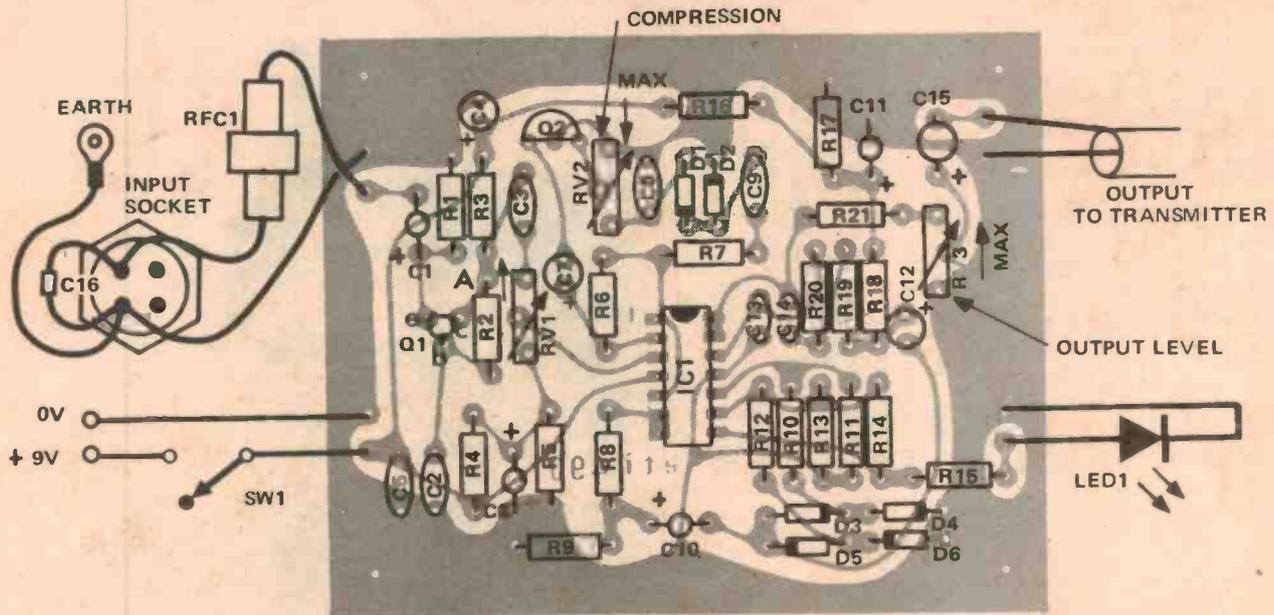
Component overlay of the Audio Processor. Note the RF choke and capacitor mounted between the PCB and input socket.
